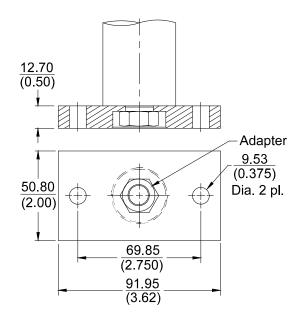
9200 and 74712 Mounting Base Options -03 or -08 Option -03 Flanged or Option -08 Isolated Flanged
